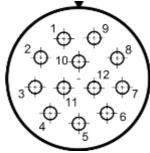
View on solder cup side of socket (rear view of female counterpart to be connected to sensor)
